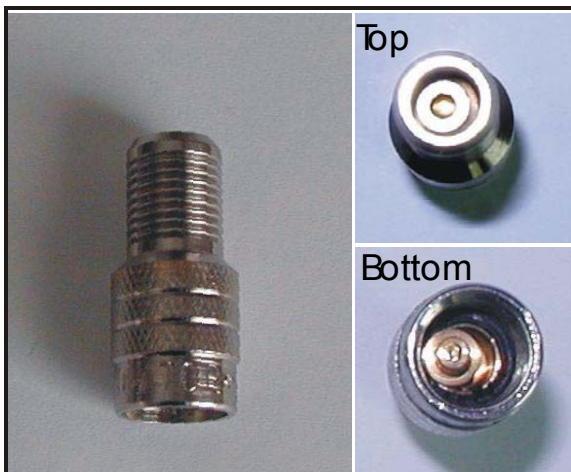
Alligator valve cap. The top and bottom views show the core "cocked."
